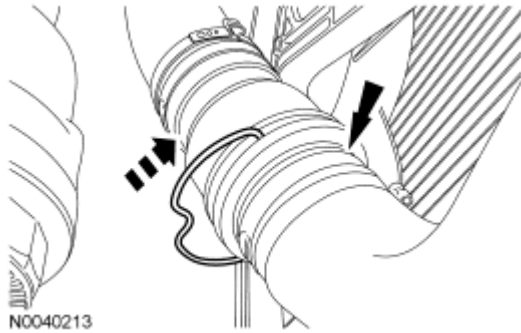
Identifying Lower Radiator Hose And Installing Retaining Clip
